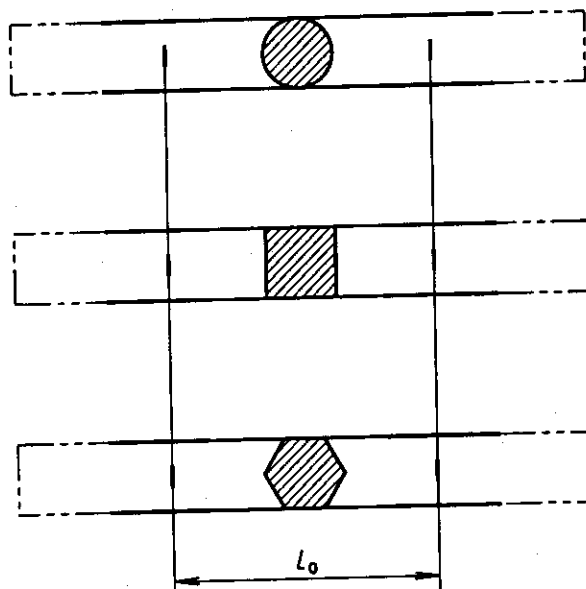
Example of test pieces comprising a non-machined portion of the product
